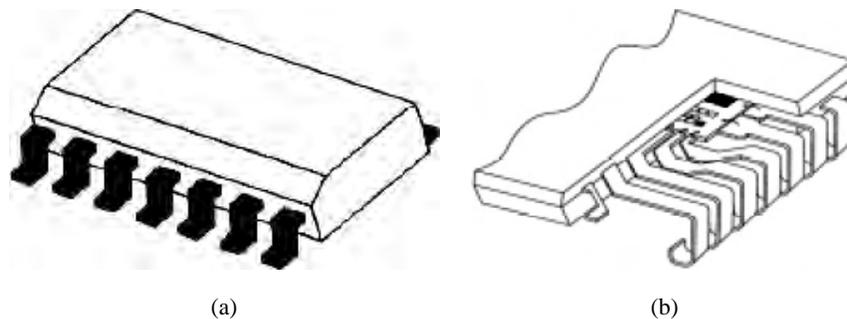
Small outline package with (a) gull wing leads and (b) J-bend leads [5].
